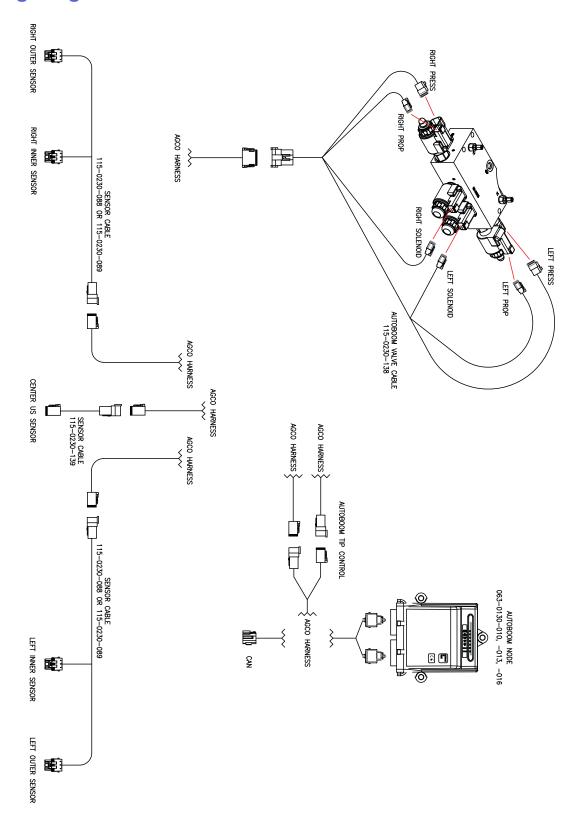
Valve Harness Installed on the AutoBoom Valve
